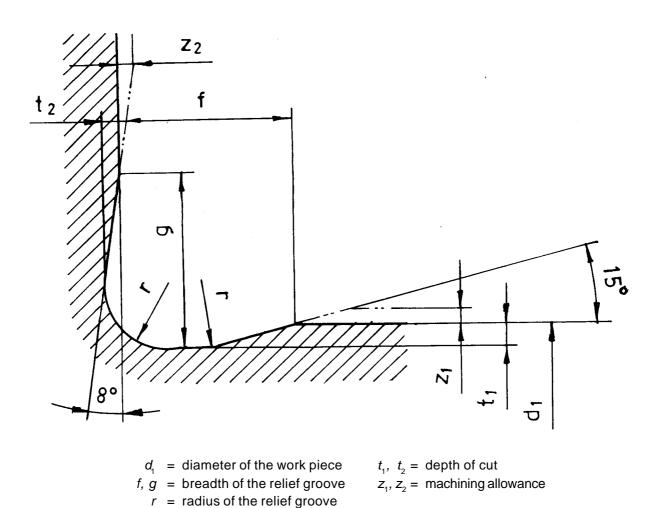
RELIEF GROOVE FOR THE PLANE AND THE CYLINDRICAL SURFACE FOR FURTHER MACHINING
